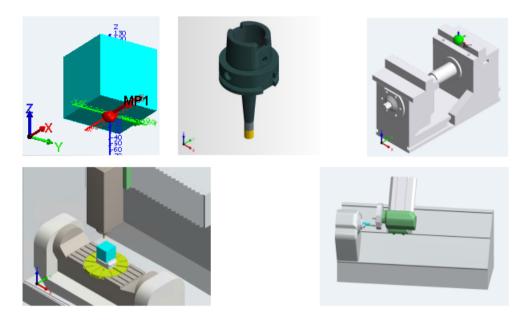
Examples of 3D images that can be zoomed, rotated and moved
